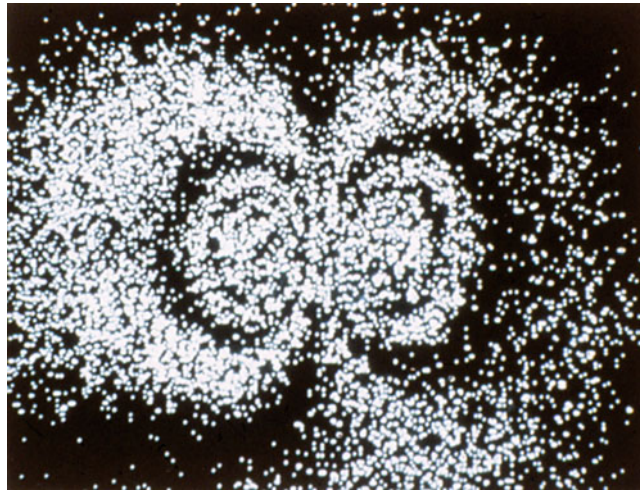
Raw speckle shearography correlation fringe pattern showing impact damage to a composite NGV fuel tank
